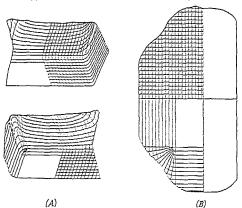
Metal flow in rectangular draws: (A) blank marked before drawing; (B) corner areas after drawing.
